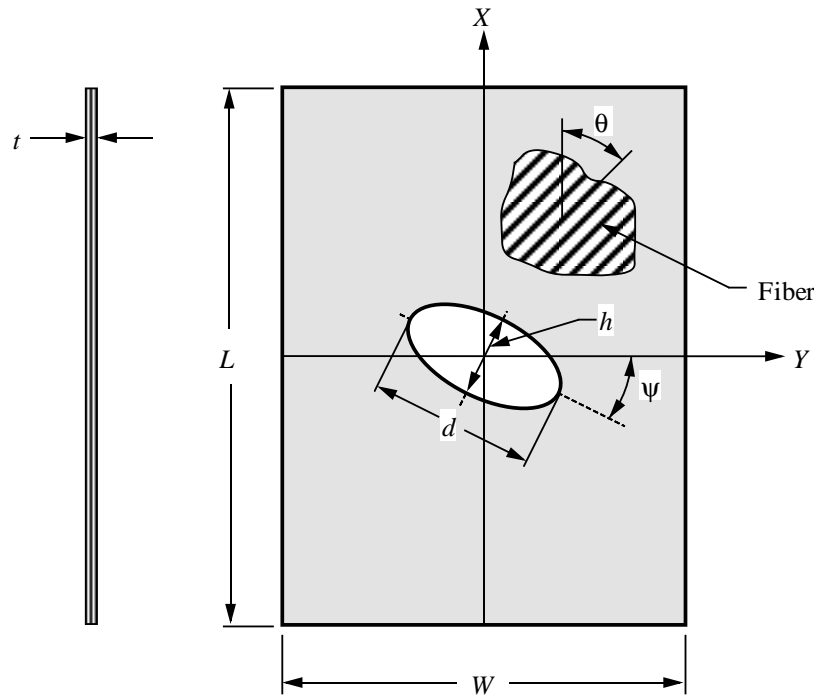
Geometry and dimensions of a plate with a centrally located elliptical cutout.
